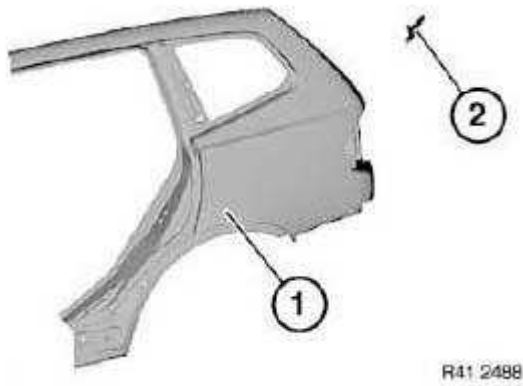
Side Panel, Rear And D-Pillar Shaped Part
